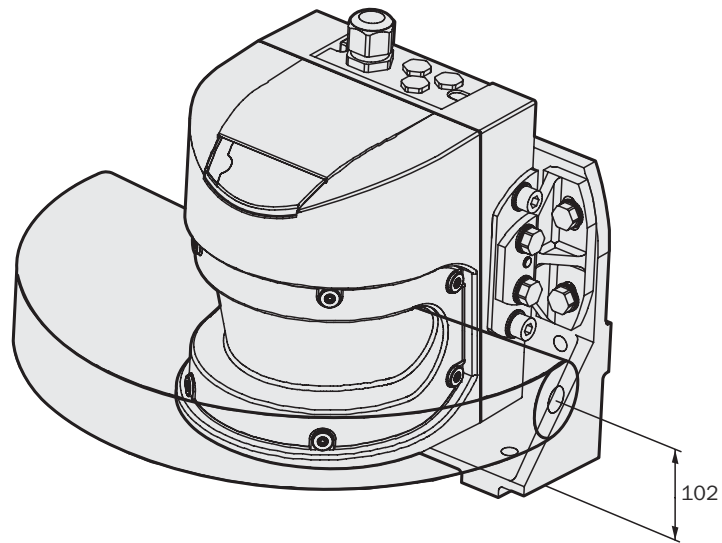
Dimensional drawing scan plane origin with mounting kit 3 (mm)
